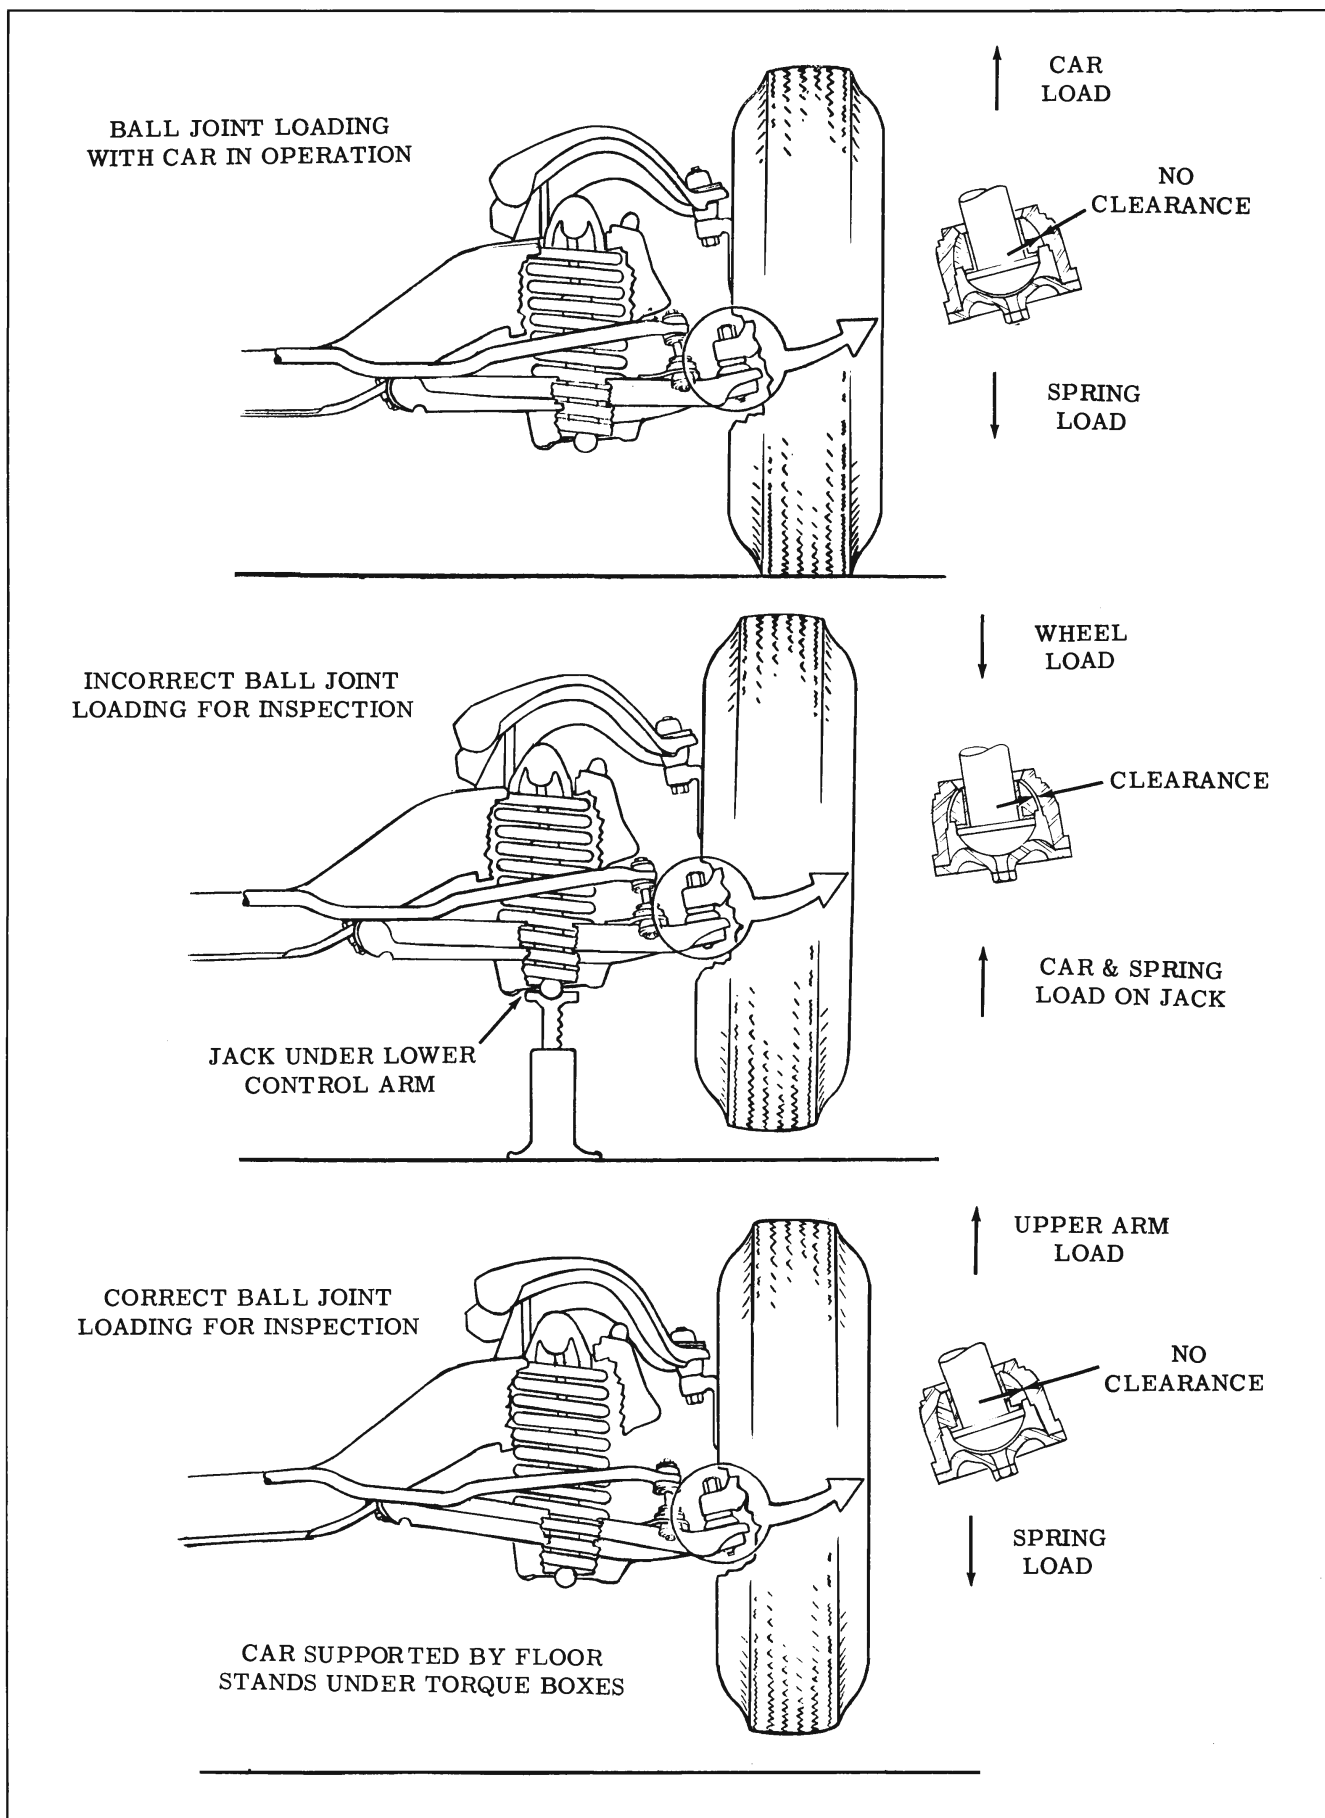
Supporting Car While Checking Lower Control Arm Ball Joints
